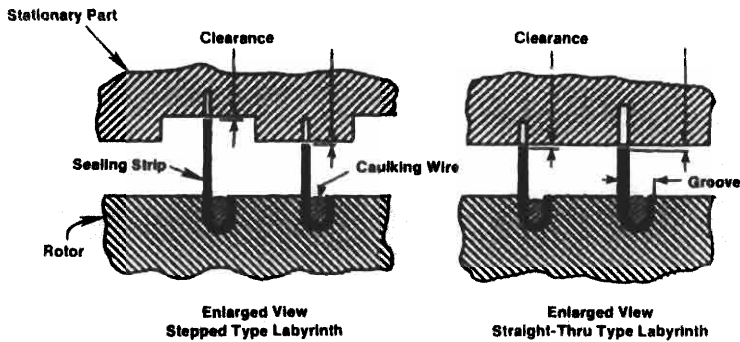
J-strip type labyrinth seal. (Courtesy of A-C Compressor Corporation)
